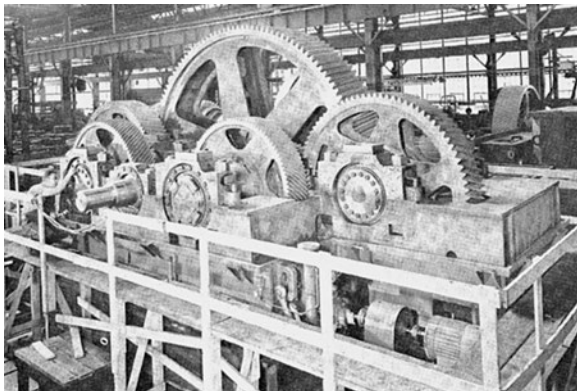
Large mill gear drive. Note twin power paths to bull gear. (Courtesy of the Falk Corporation, Milwaukee, Wisconsin.)
